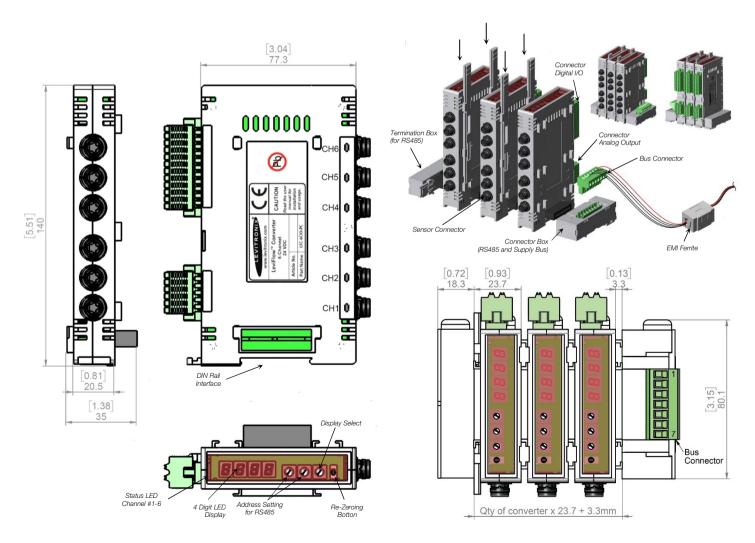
Dimensions, mounting and stacking concept of converter LFC-6CIO-PC
